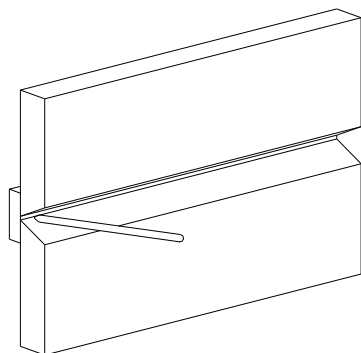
WELDING POSITIONS
